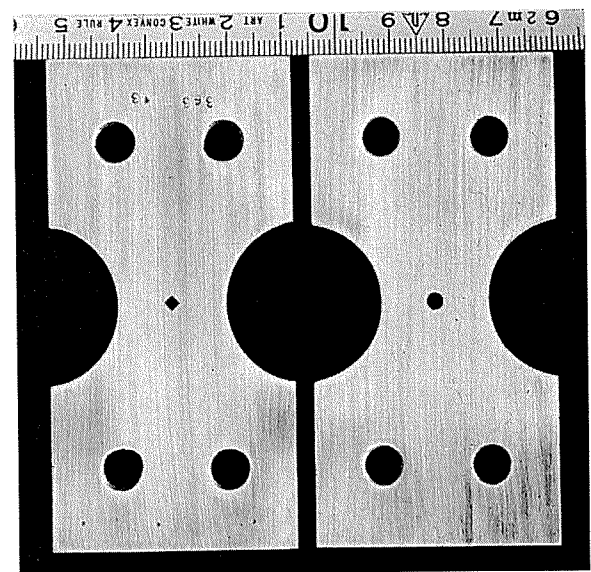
Form and dimensions of plane-bending fatigue test specimens.
